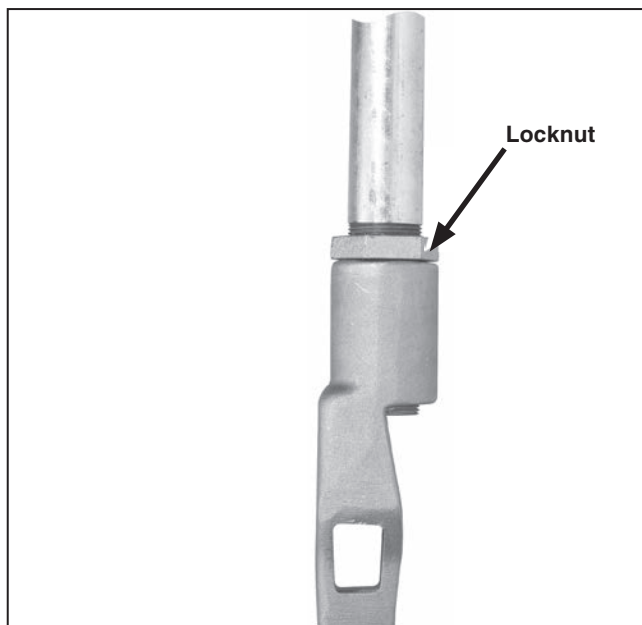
Installing the lowest operating pipe section into the operating handle assembly.
